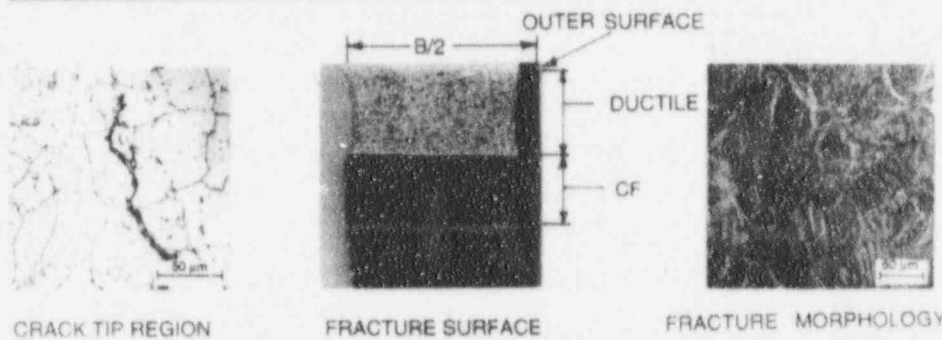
Crack path, fracture surface, and fracture morphology of ITCT specimen of Alloy 690 (No. HG-07) after crack growth experiment in HP water at 289 and 320°C
